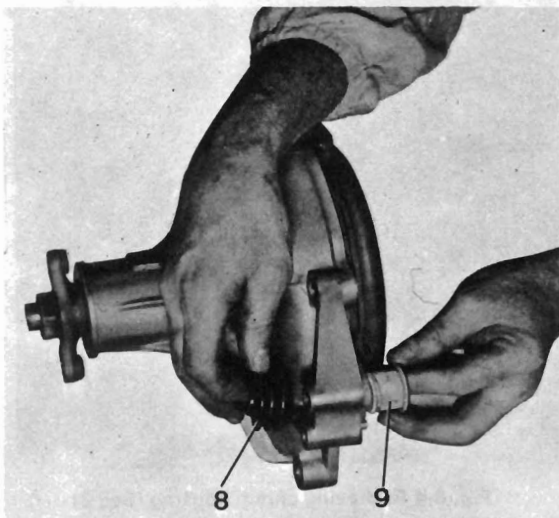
Removing gear selector rod boot (8) and plastic bush (9)
